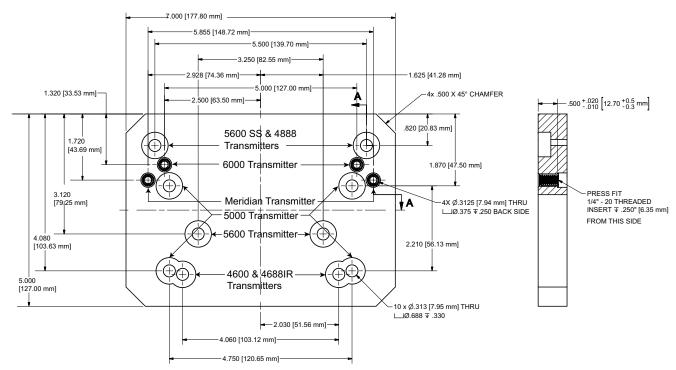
Retrofit Mounting Plate Dimensions - HDPE
